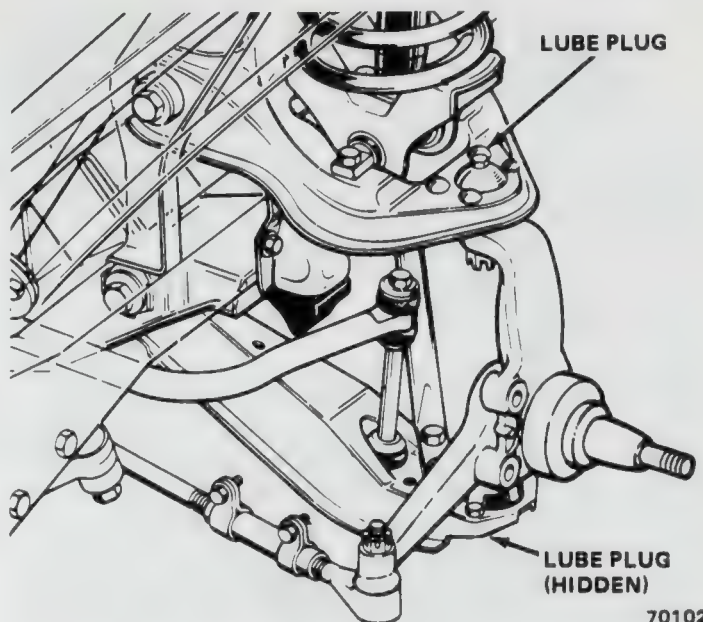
Ball Joint Lube Plugs—Gremlin-Concord-AMX-Matador
